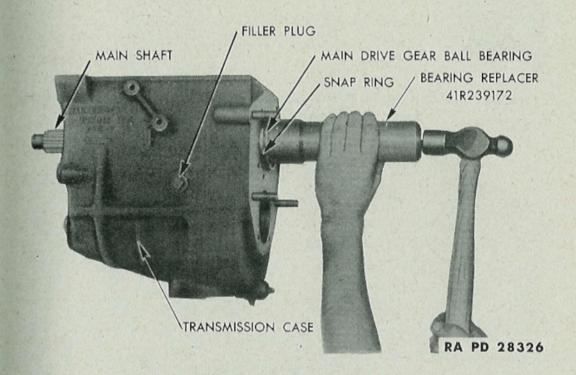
Driving Main Drive Gear Bearing into Case with Bearing Replacer 41-R-2391-72
